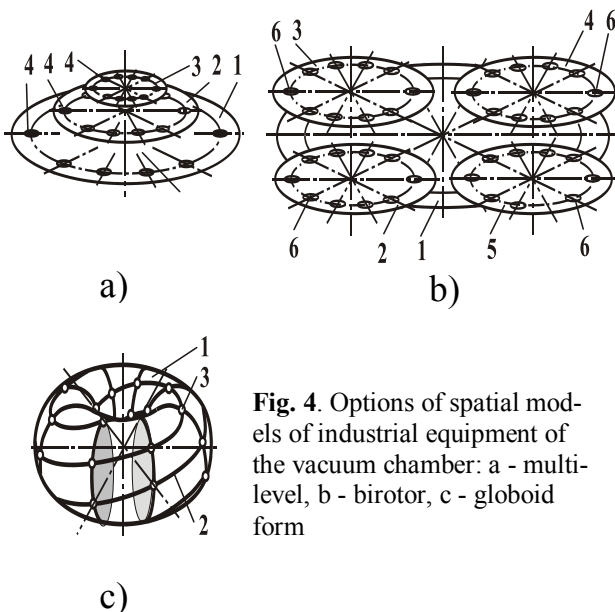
Options of spatial models of industrial equipment of the vacuum chamber: a - multi-level, b - birotor, c - globoid form
